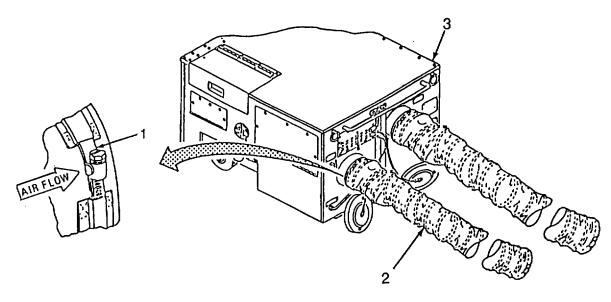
Duct Assembly (Sheet 1 of 2)
